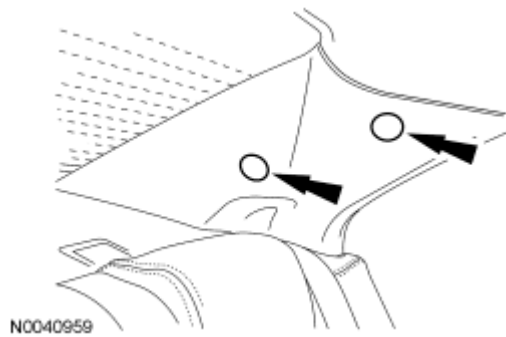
Locating LH C-Pillar Trim Cover Retainer Caps
